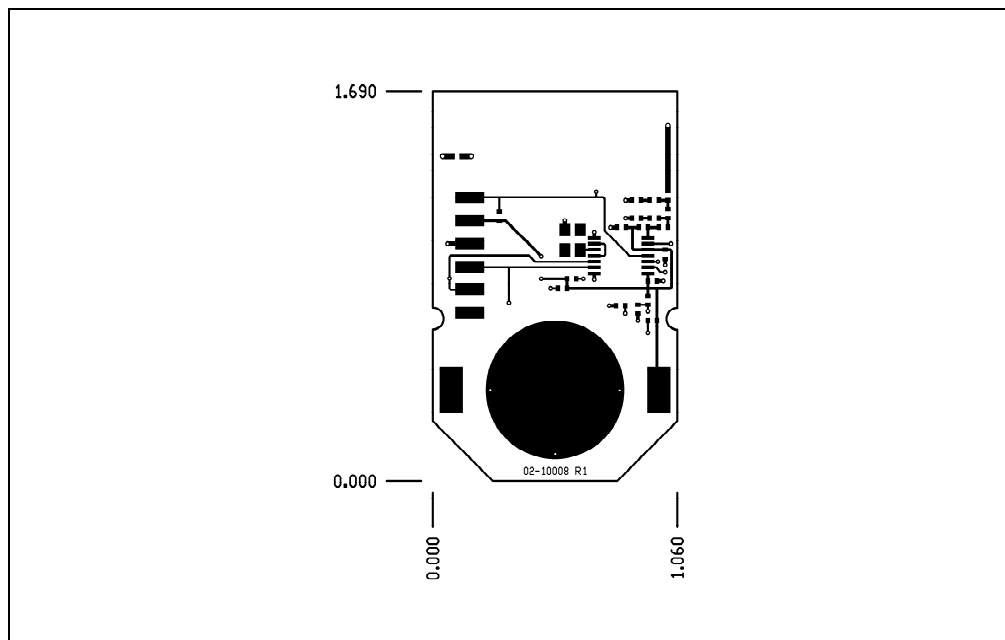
KEY FOB PCB ASSEMBLY – BOTTOM COPPER
